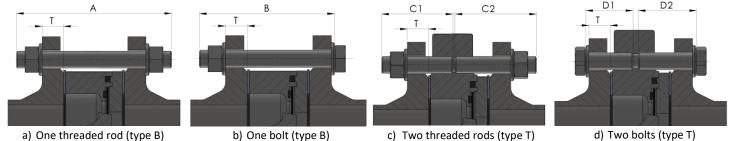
Dimensions of fasteners for valves DN50-DN600 with type B and T bodies
